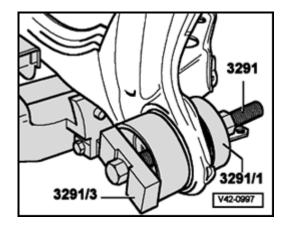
Pressing in rear bonded rubber bushing in subframe
